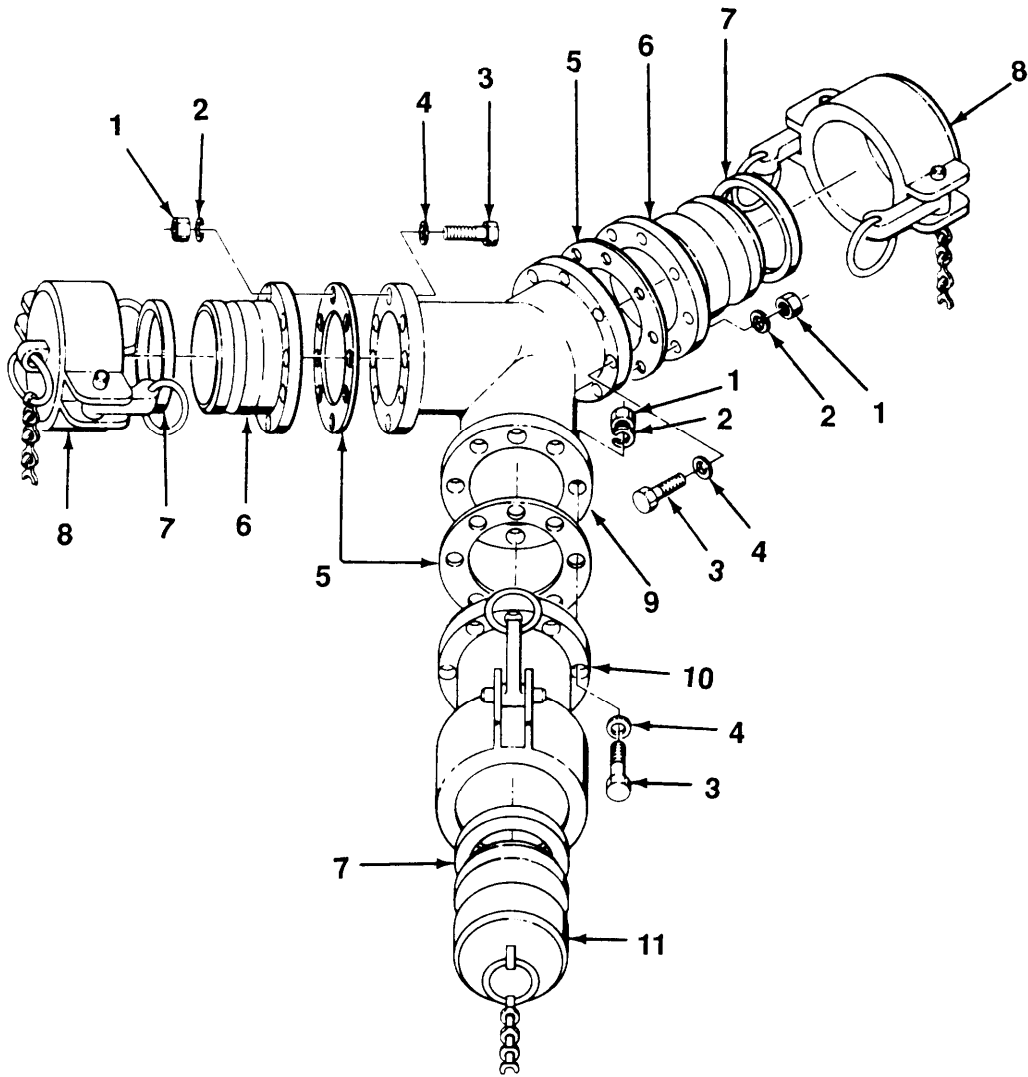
Wye Assembly, 4 In., w/1 Female, 2 Male
